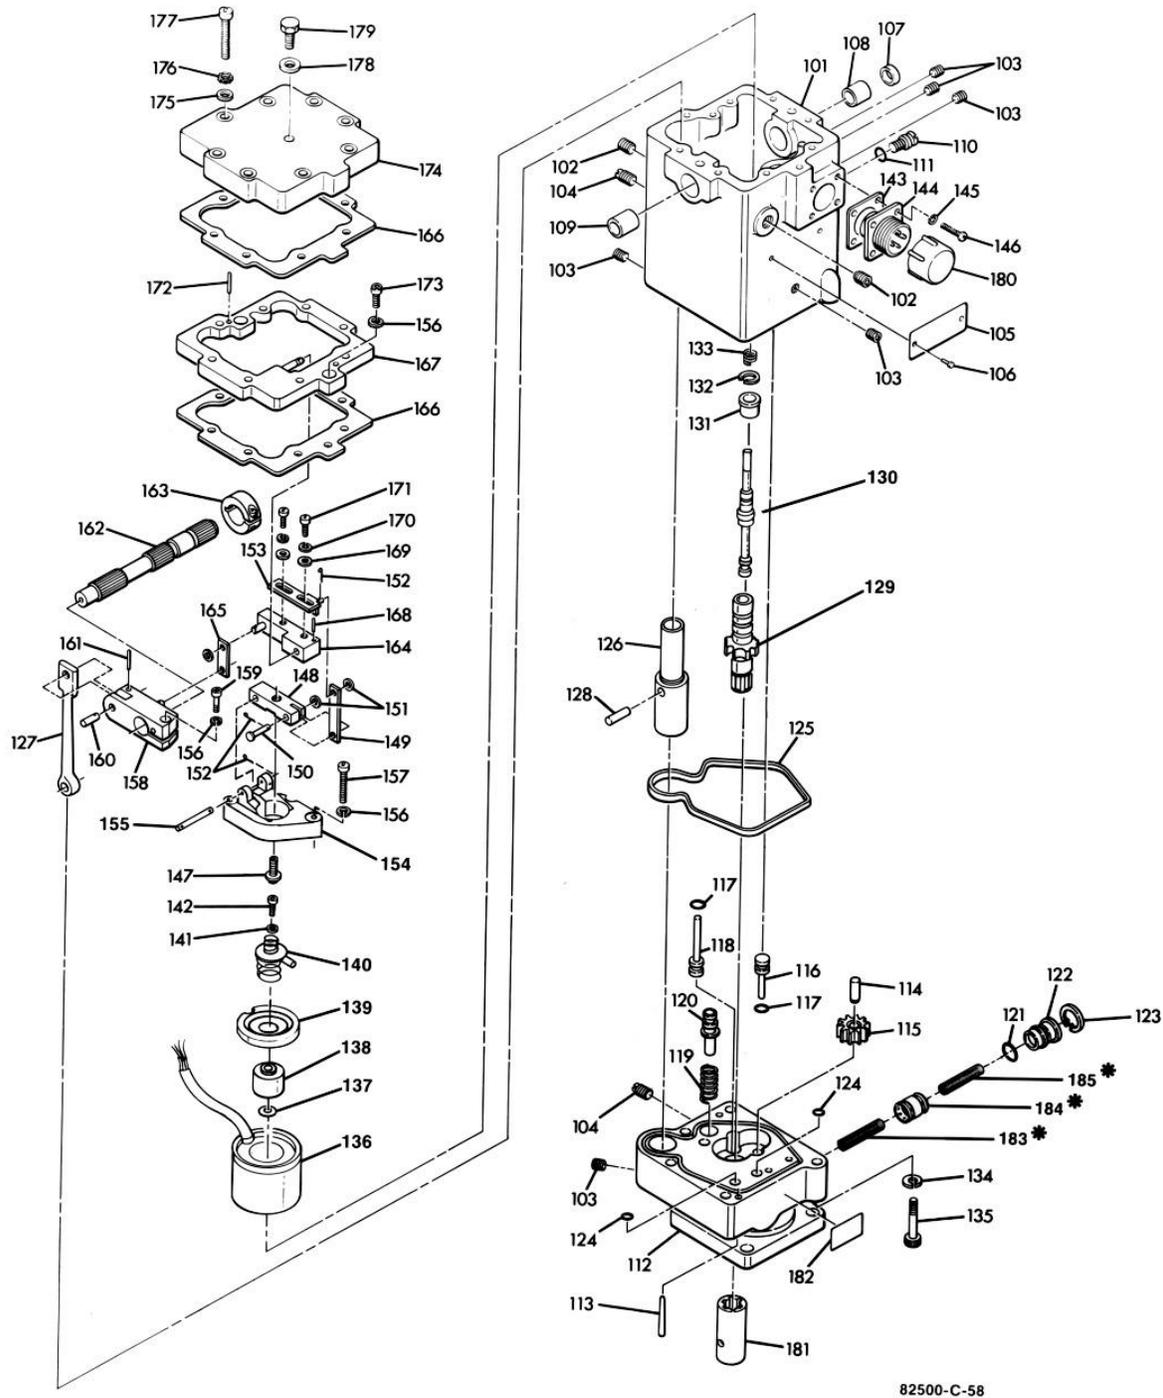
Parts for the EG Actuator (Oil Motor Model)
